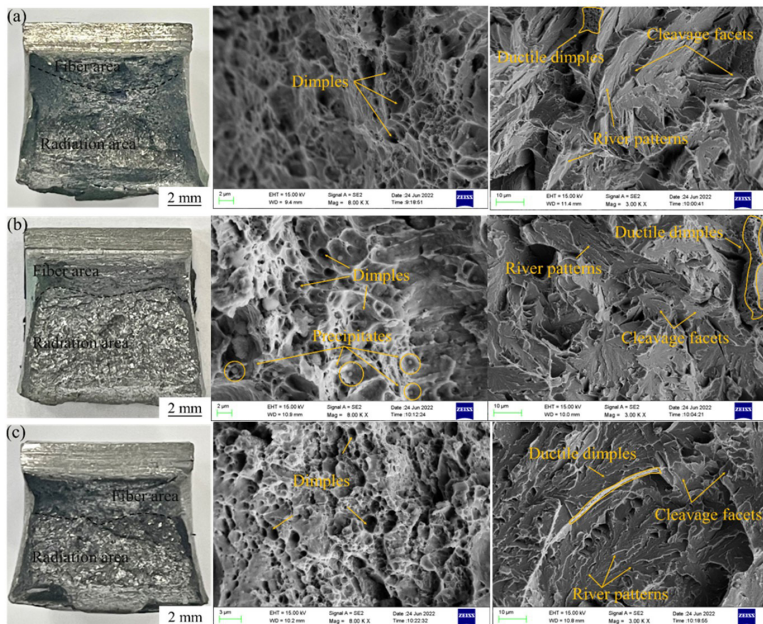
Impact fracture morphology in HAZ of welded joint: (a) Cover area, (b) Filling area, (c) Root area.
